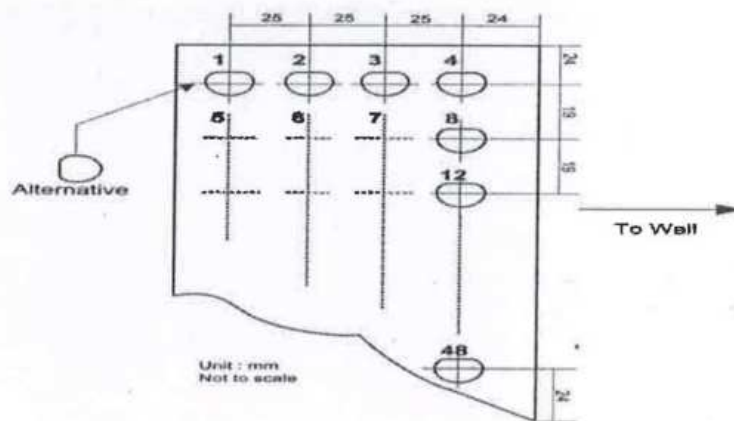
Typical FC patch panel of wall mounted FDF 48F (12 rows x 4 columns)
